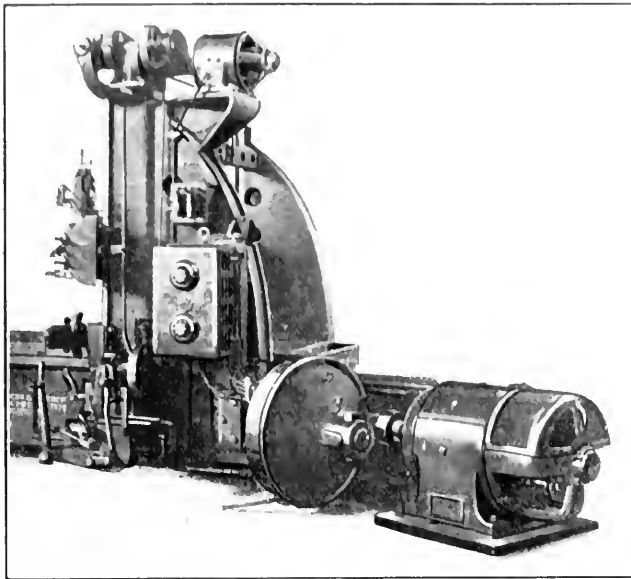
A 48-IN. BY 48-IN. PLANER DRIVEN BY A 20-HP., FOUR-TO-ONE ADJUSTABLE SPEED-REVERSING MOTOR (CONTROLLER ON PLANER FRAME)
